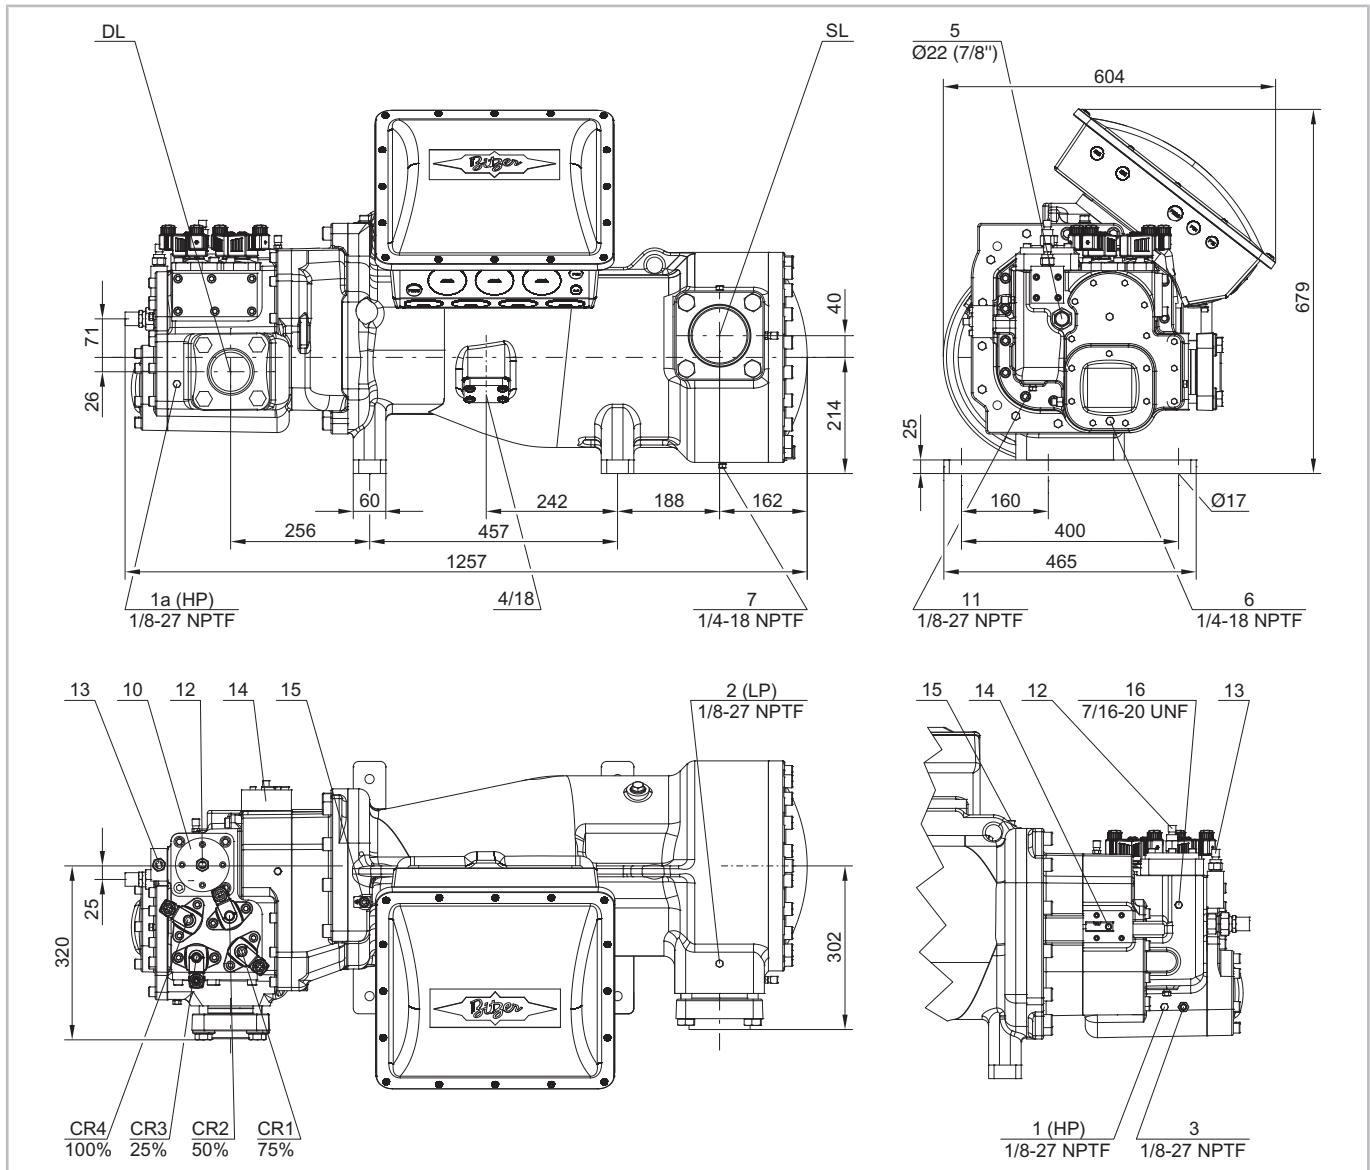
Dimensional drawing HS.8551 .. HS.8571
